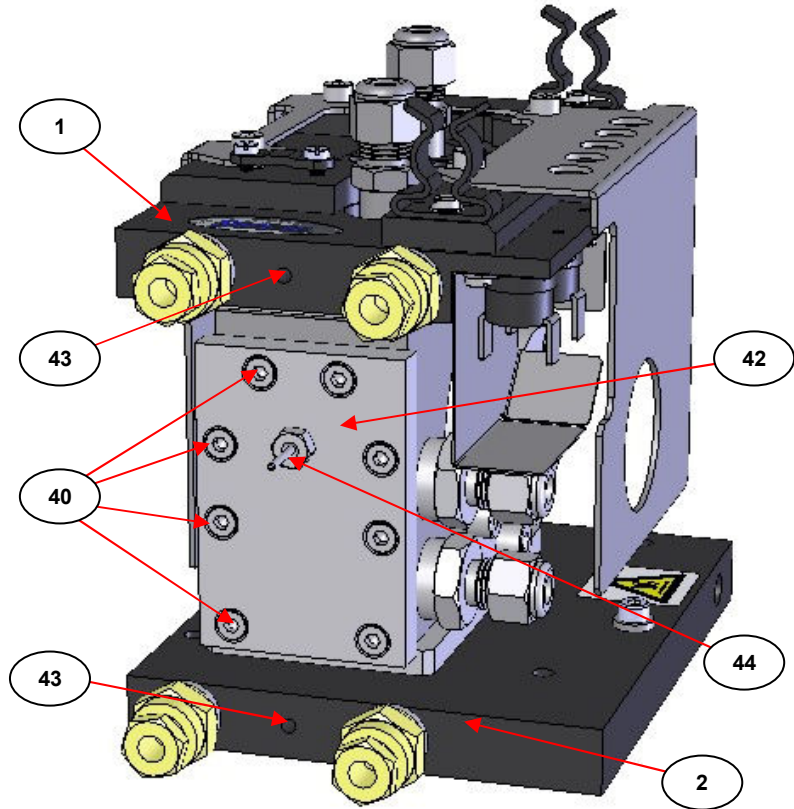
End Plate of the HTHP Cell Opposite to the Wiring Strap and End Plate of the Heater Block Assembly (10)
